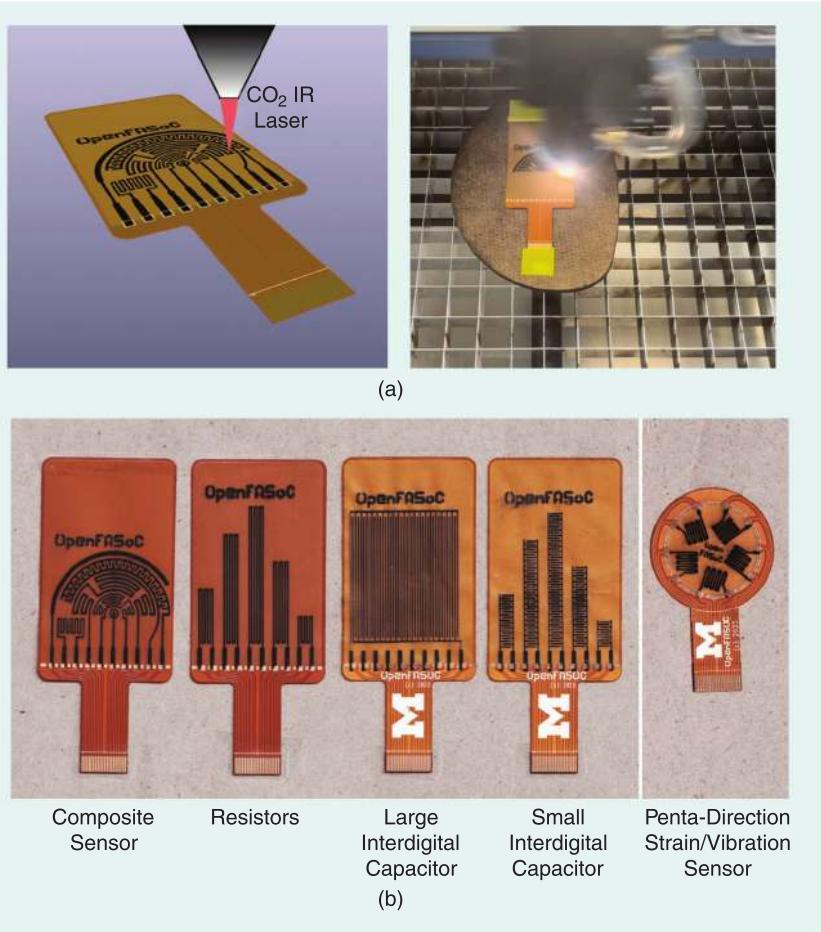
The (a) LIG sensor fabrication and (b) fabricated samples.
